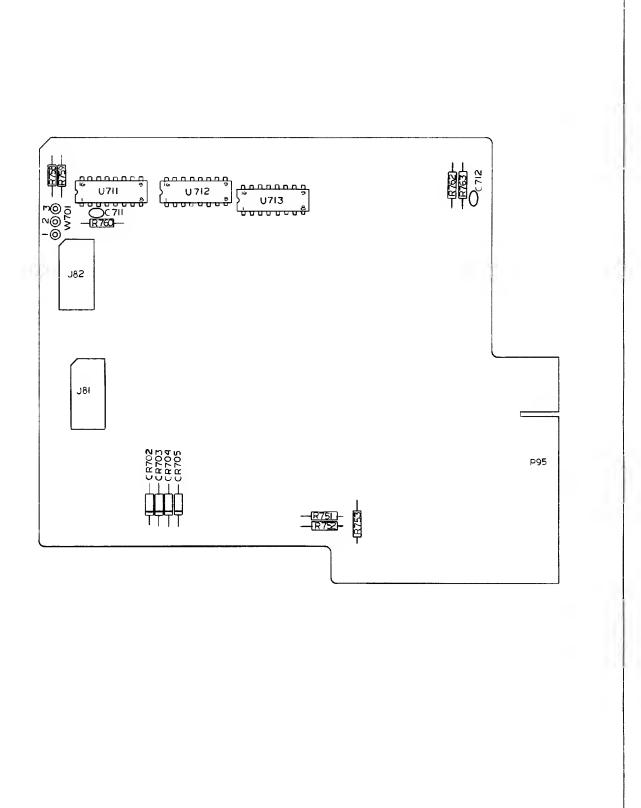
A10 Basic Remote Control Unit PCB Assembly, -11 Option
